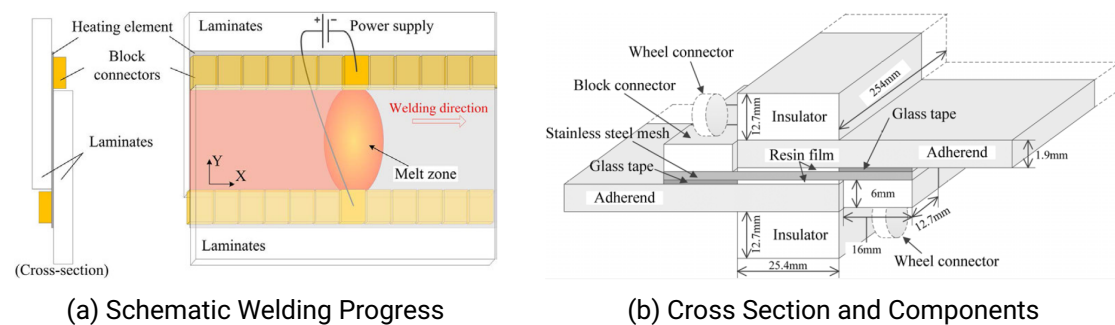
Continuous Resistance Welding (Shi 2014)
